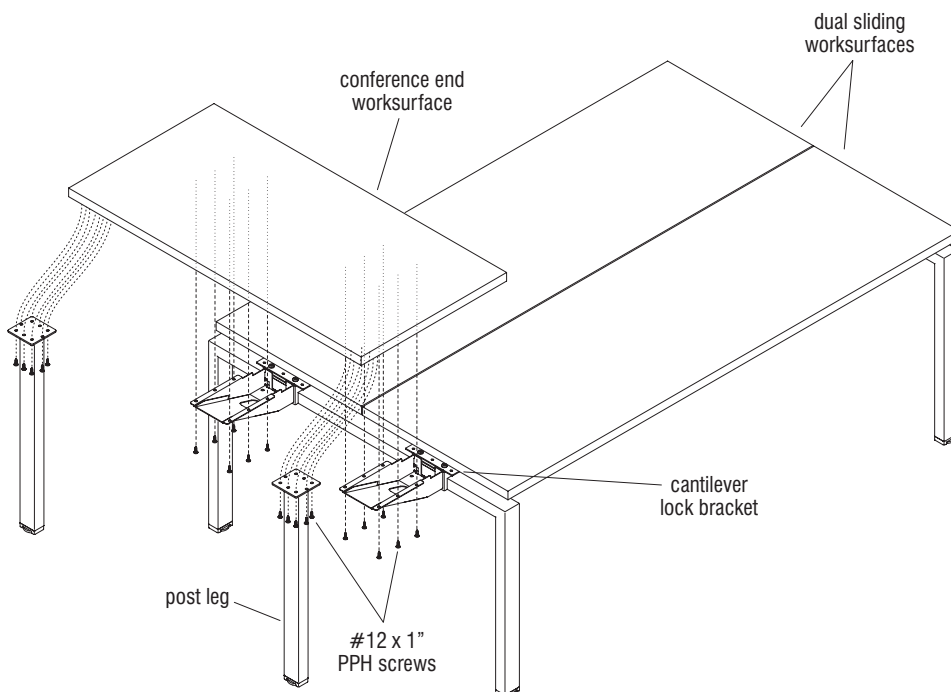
Conference End with Dual-Sided Worksurfaces (sliding shown)
